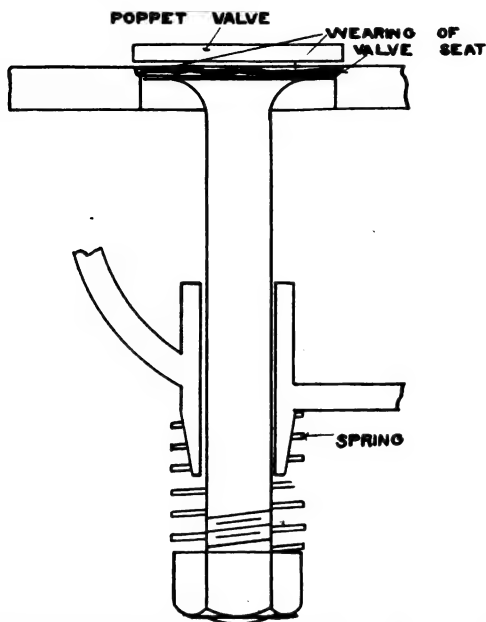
Diagrammatic View Showing the Wearing of a Poppet Valve Seat.
